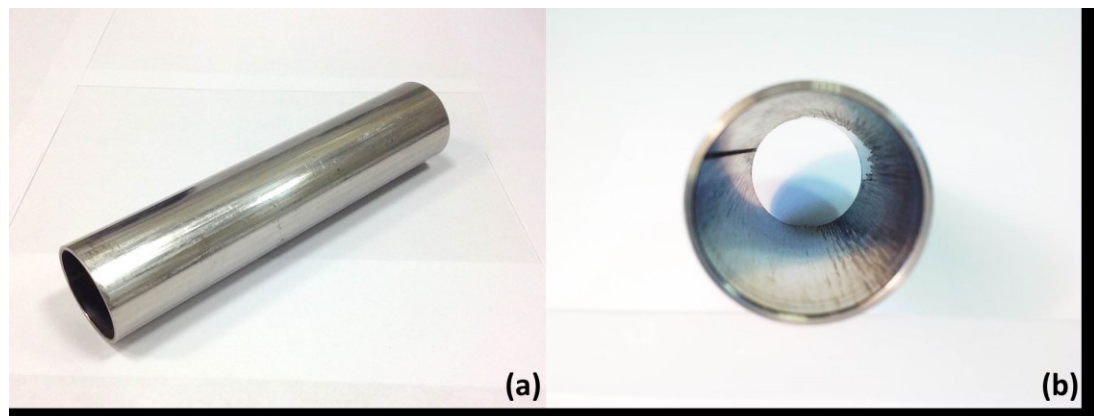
Commercial SS316 pipes machined by ECM. (a) SS316 pipe. (b) Internal face view of the SS316 pipe after ECM. The weld-flash is visible on the left side, and flow marks are evident on the right side of the pipe.
